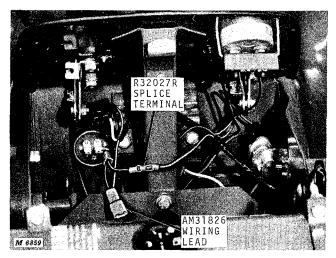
Attaching Wires to Ignition Switch, Using AM31826 Wiring Lead
